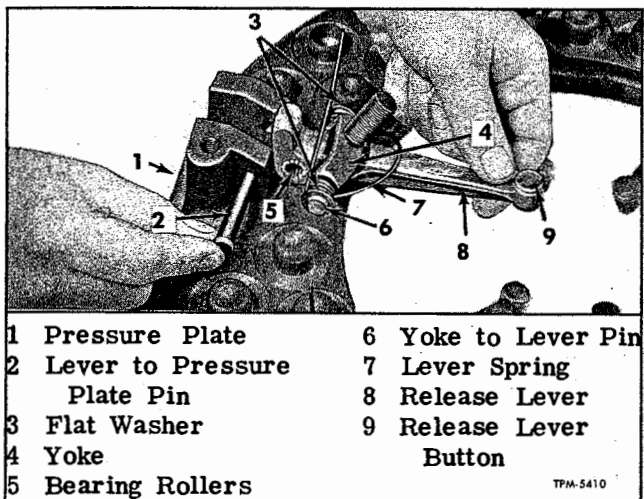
Assembling Clutch Release Lever to Pressure Plate
